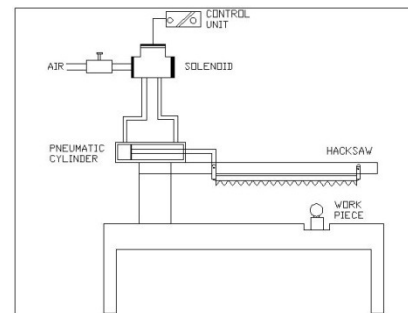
Drawing For Pneumatic Reciprocating Highspeed Hacksaw Machine
